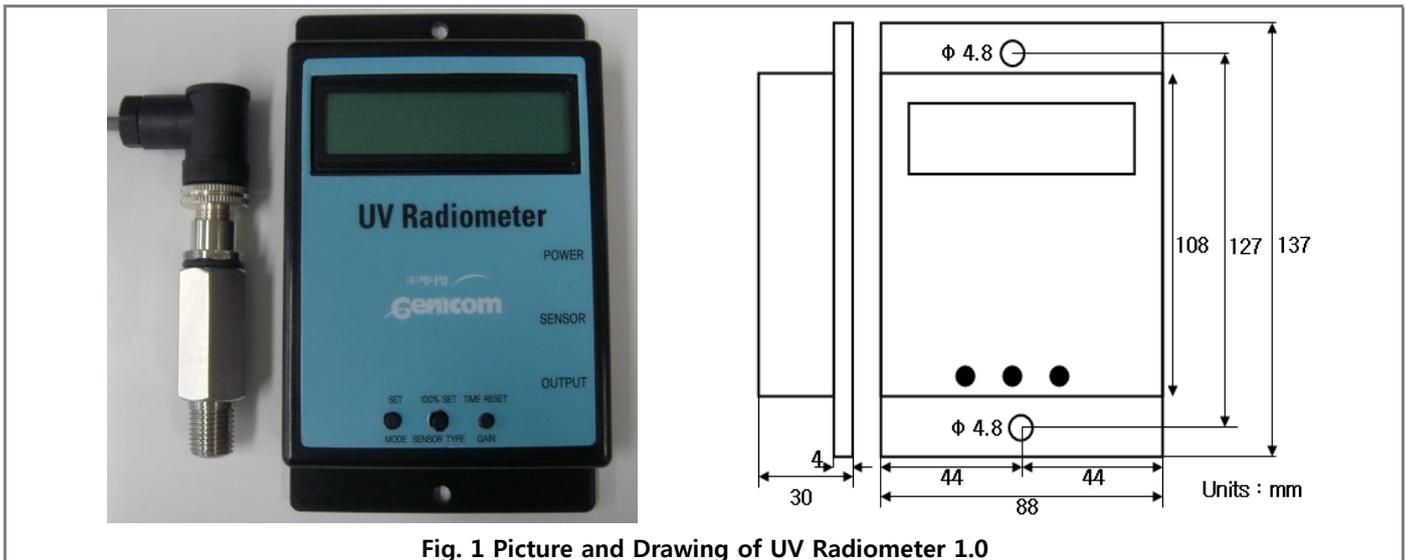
Picture and Drawing of UV Radiometer 1.0
